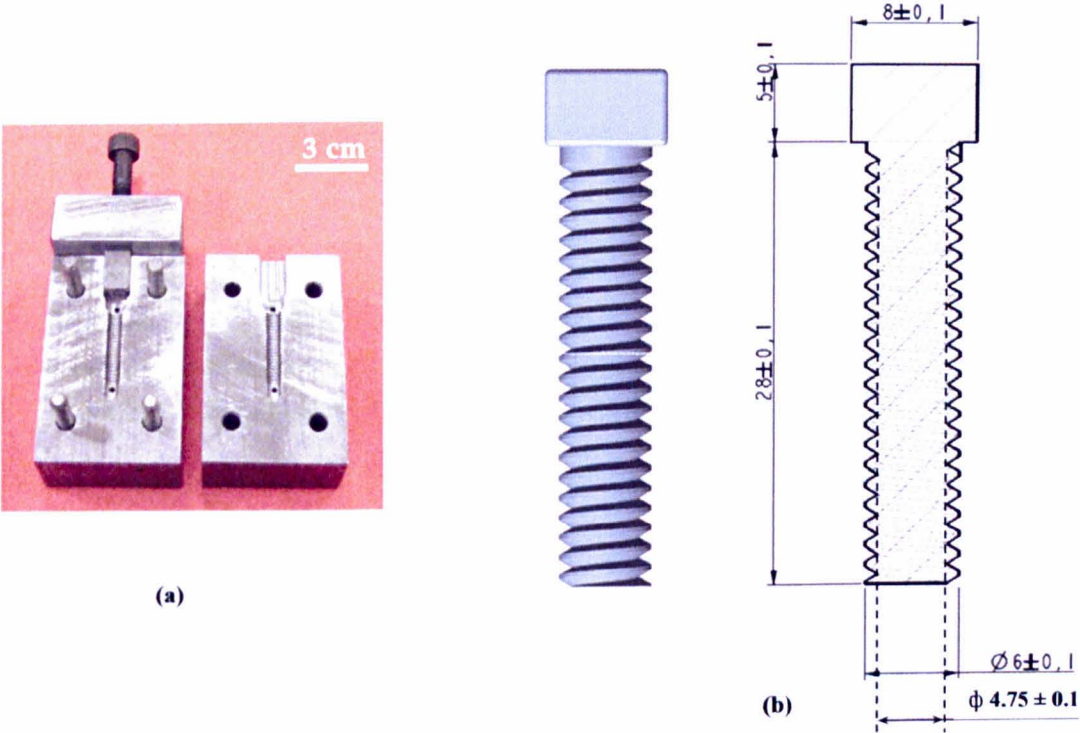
(a) *Photograph of the mould used for manufacturing screws* and (b) *Dimensions (mm) of the produced screws.
